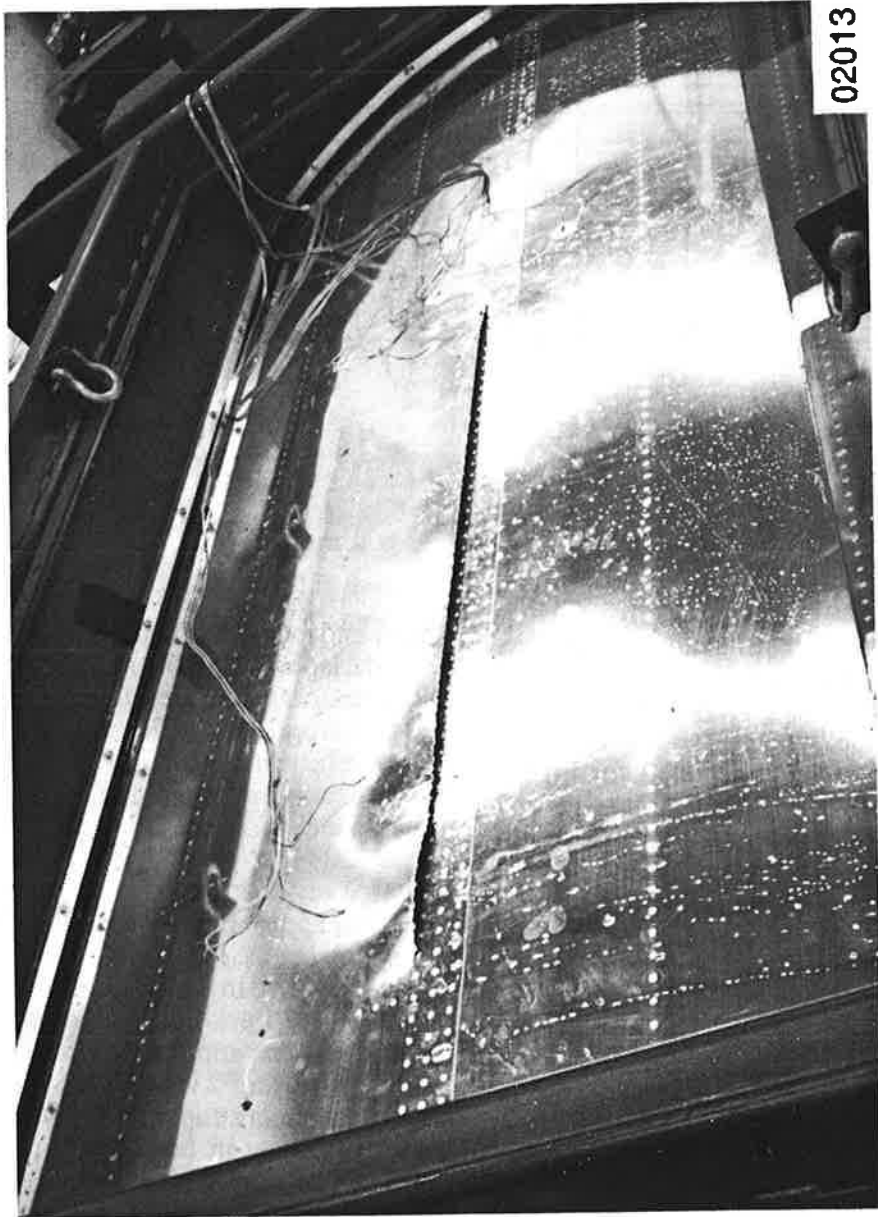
Panel 11: 29.36 in. Crack, MSD - After Fracture
